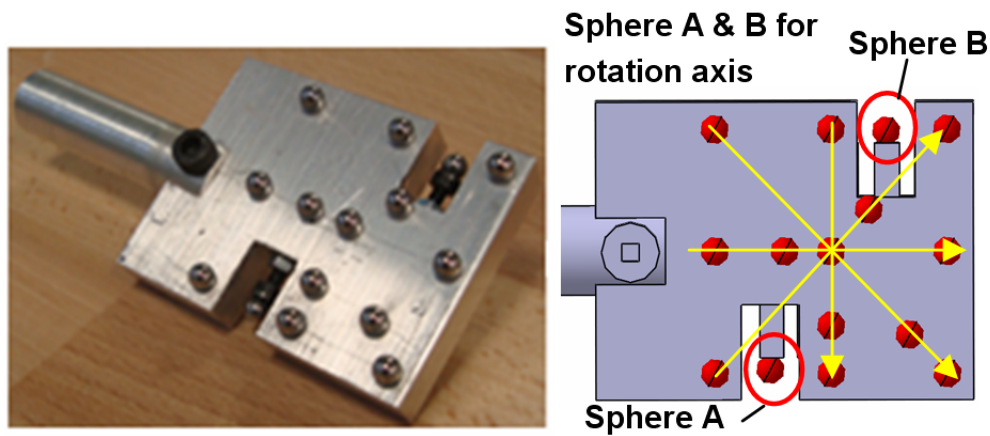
Artifact 3: 2D Technical Drawing.
